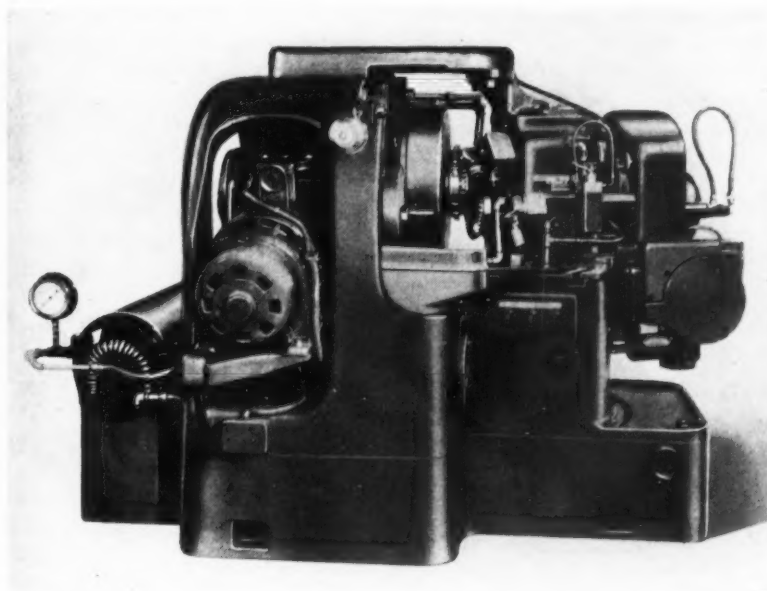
Gleason Single-cycle Gear-Finishing Machine which Finishes a Gear Tooth at Each Revolution of the Cutter
